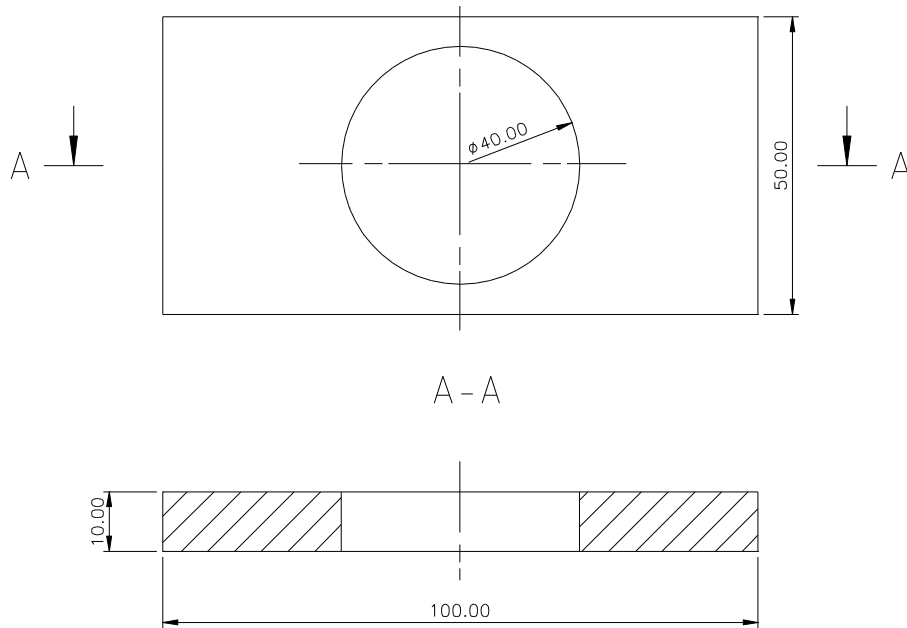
Geometry of the plate hole specimen (dimensions in mm). The specimen was taken from Bao (2003).
